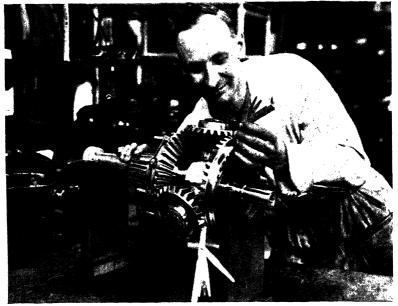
CHECKING BACKLASH OF REAR BEVEL GEAR AND PINIONS.
